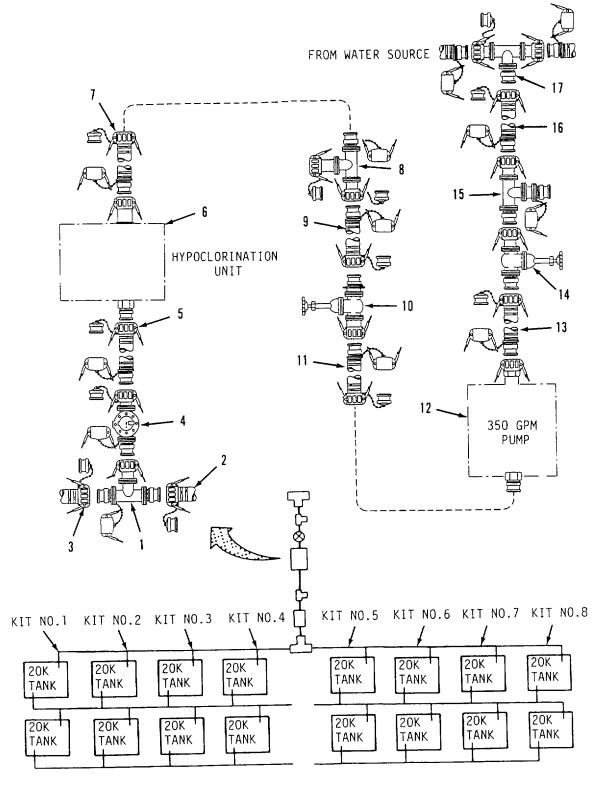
350 Gpm Pump Connection Kit (Water Source) Disassembly.
